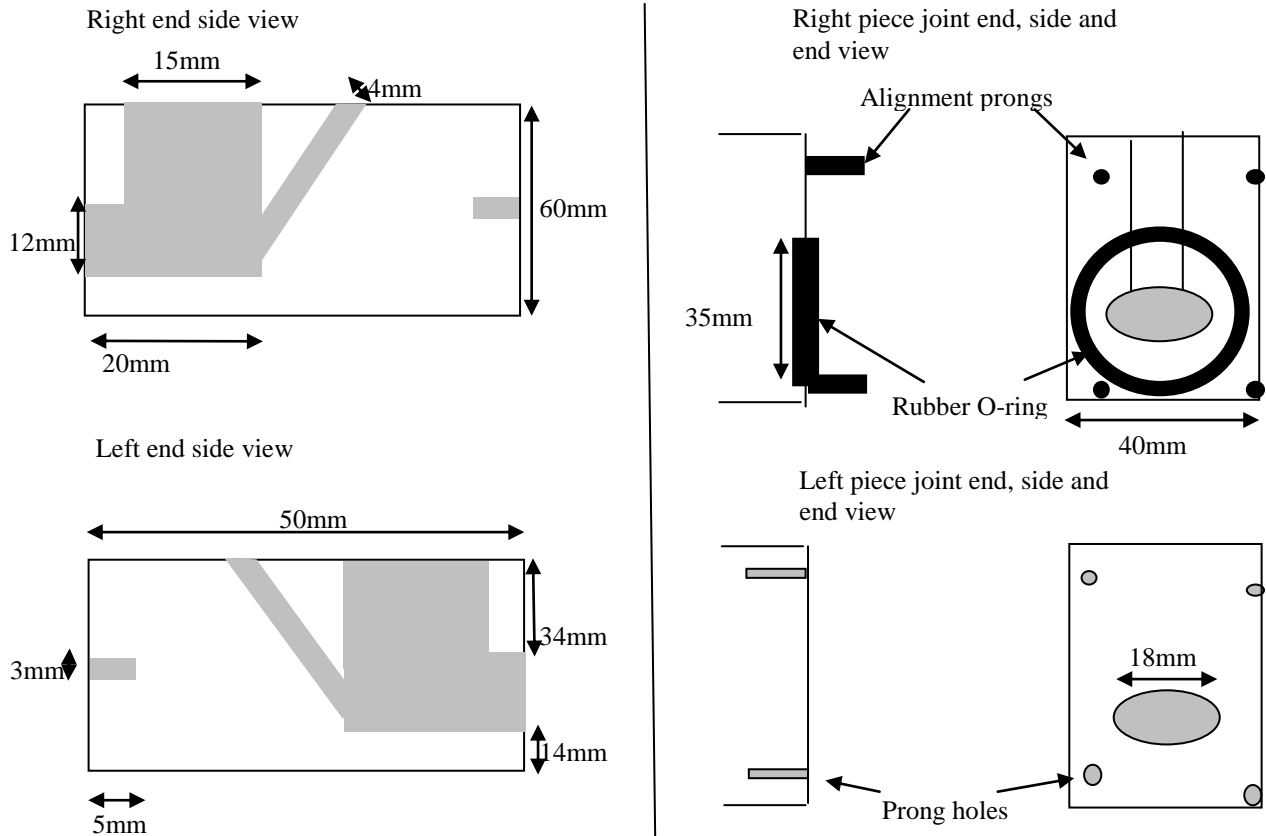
(Left) Side view cross sections of modified Ussing chamber showing the dimensions of the separated right and left-handed pieces. Grey areas depict hollowed out parts of the solid perspex cylinder.
